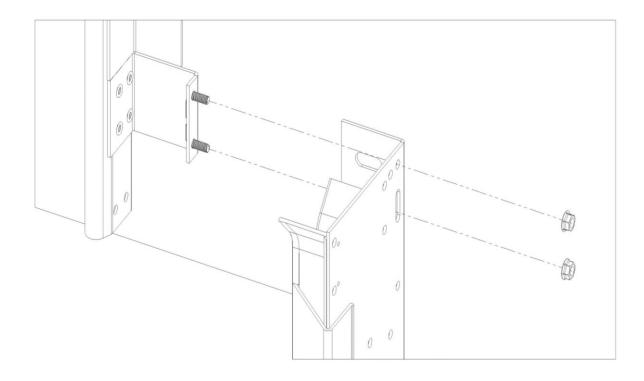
Attaching Upper Track Assembly to Mounting Rail.
